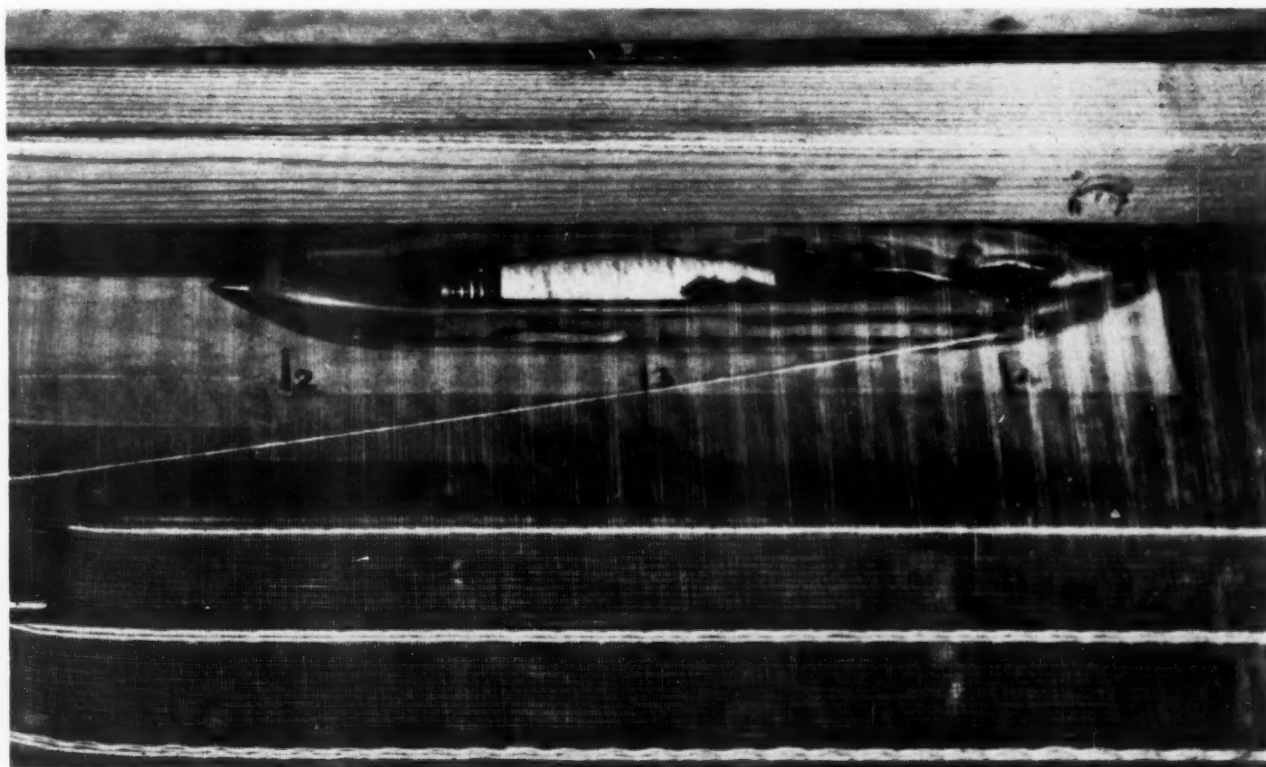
VIEW OF SHUTTLE SHOWN IN FIG. 2 TAKEN WITH AID OF STROBOSCOPE
